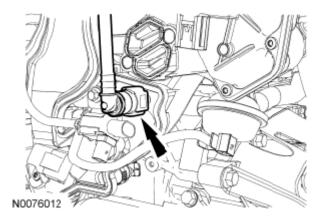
Locating Fuel Tube Quick Connect Coupling Courtesy of FORD MOTOR CO.
